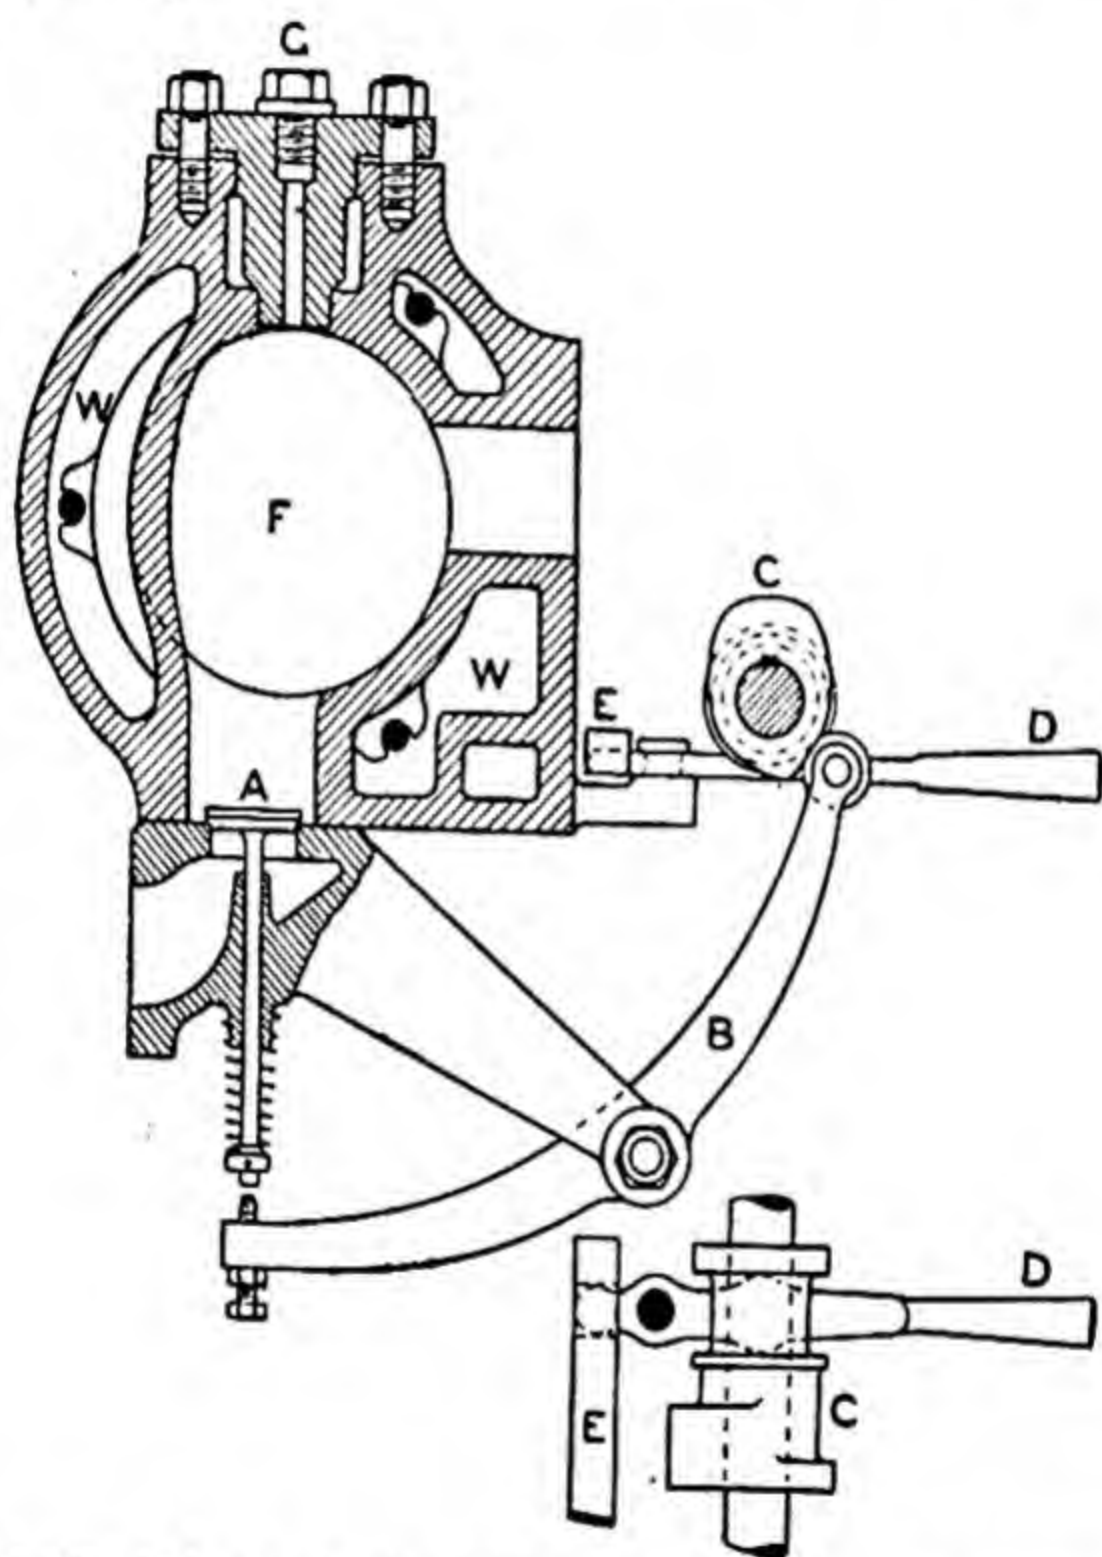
Exhaust valve and starting gear of the Crossley gas engine.
